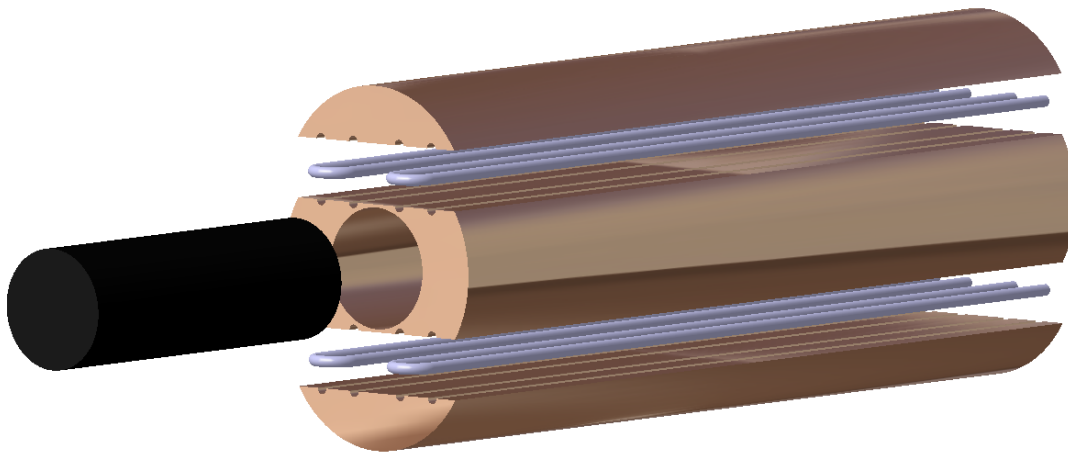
Schematic of the division for the dump manufacturing: first the three CuCr1Zr parts and the cooling pipes would go through the HIP process, and then the graphite diluter would be inserted.
